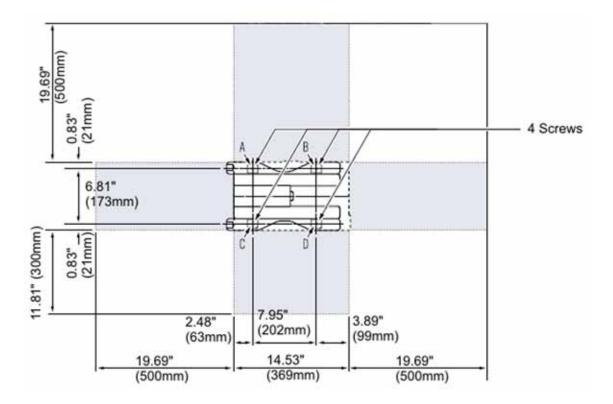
Wall Mount Spacing Guide (9.5" Chassis)
